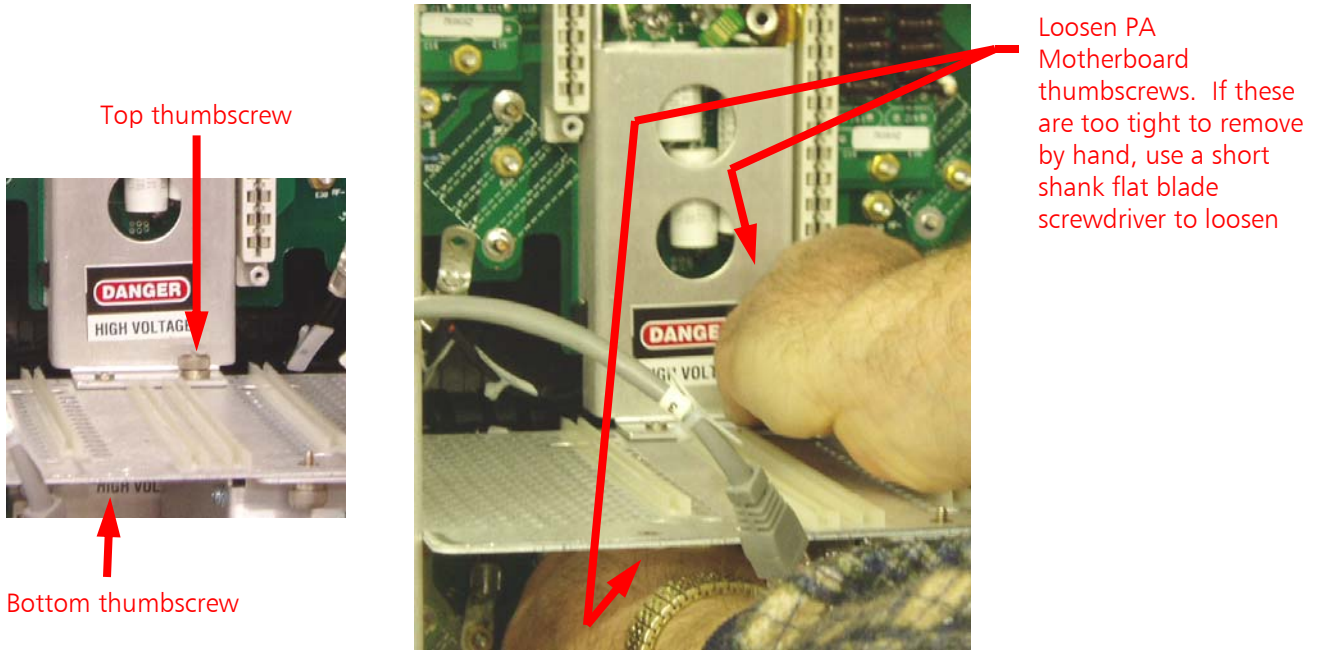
Loosen PA Motherboard Bracket Thumbscrews
